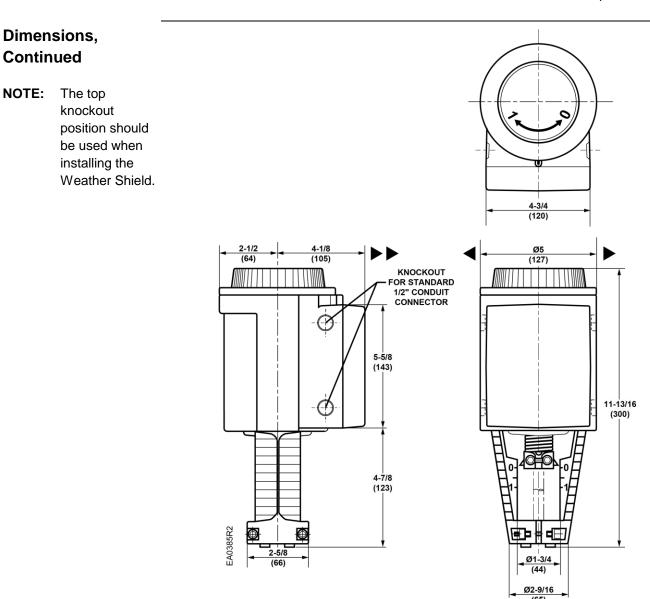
Dimensions of SKD6xU Actuators in Inches (Millimeters).
